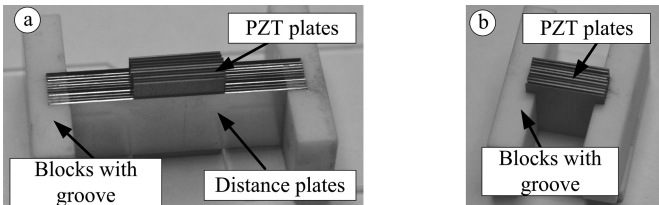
(a) Stacking device 1 with distance plates; (b) Stacking device 2
